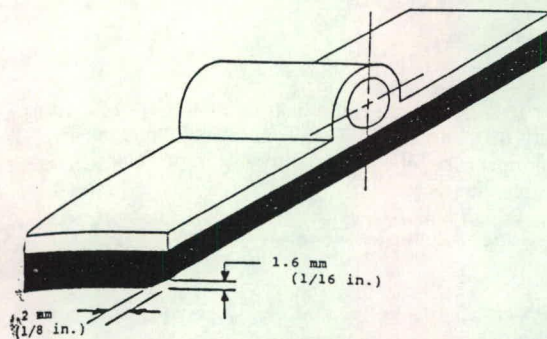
Slider Assembly Illustrating the Maximum Wear on Striking Edge
